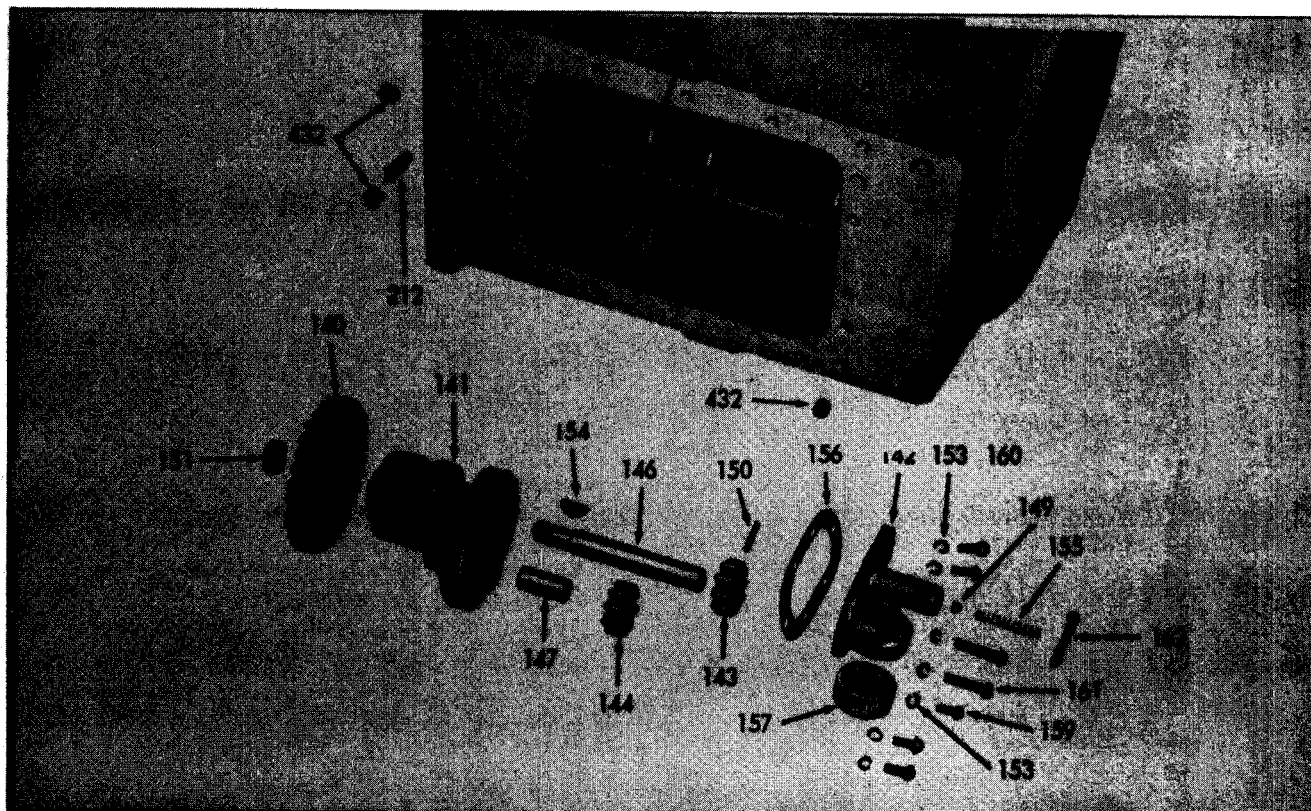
, Ref. No. 139, OIL PUMP ASSEMBLY
